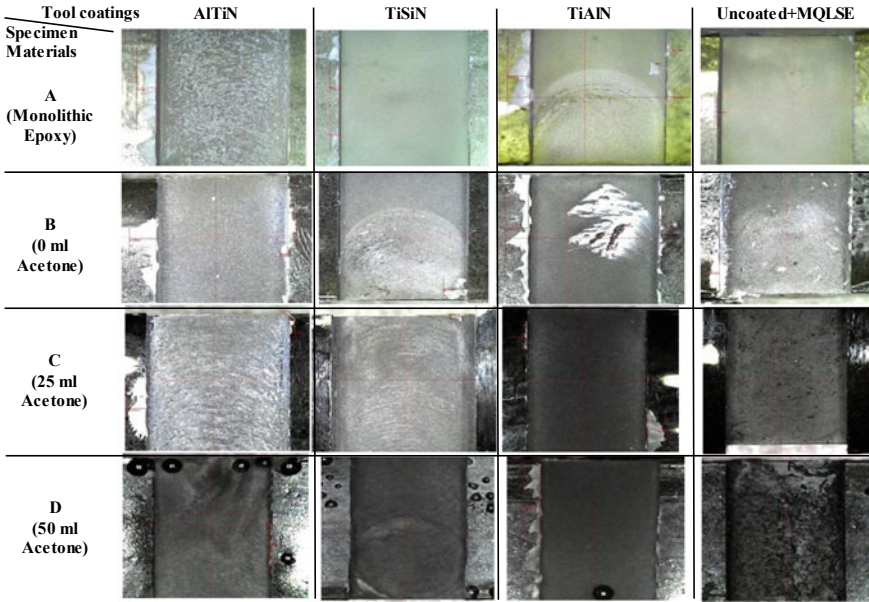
Optical images of the machined surfaces at 4th pass on all specimens' materials
